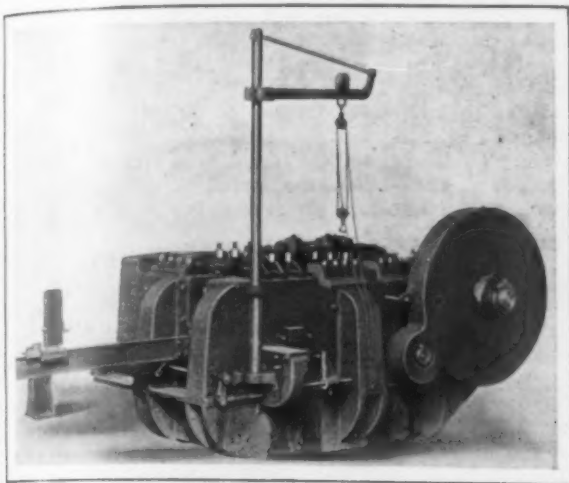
Front View of a New 4-In. Heavy Pattern Forging Machine
